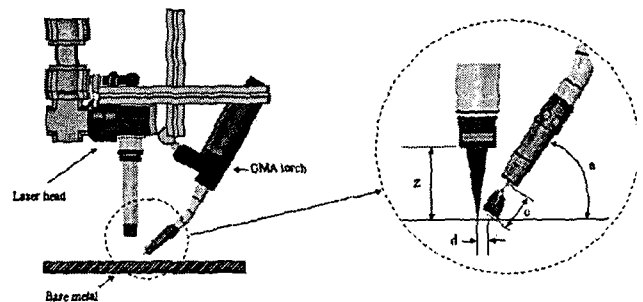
Experimental setup and parameter definitions for CO₂ laser-GMA hybrid welding
